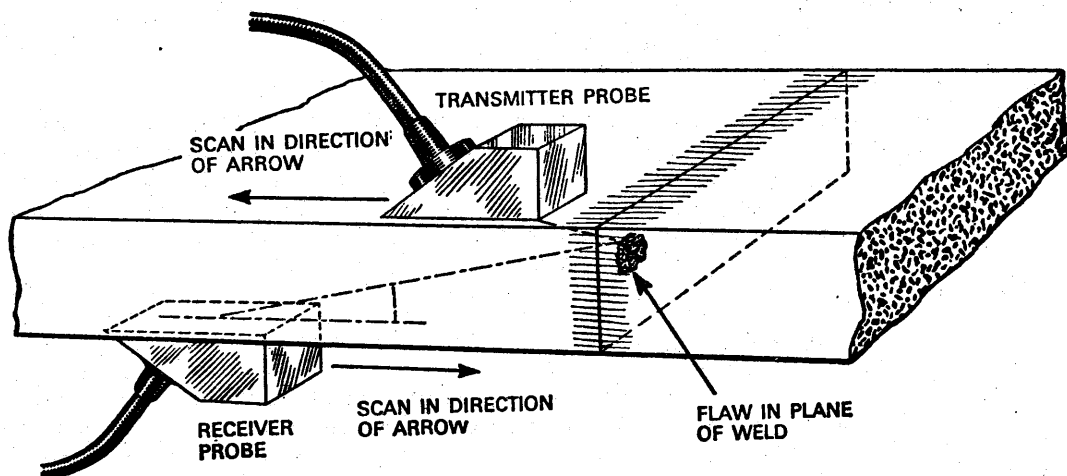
SCANNING METHOD FOR FINDING FLAWS IN FLASH BUTT WELDS
